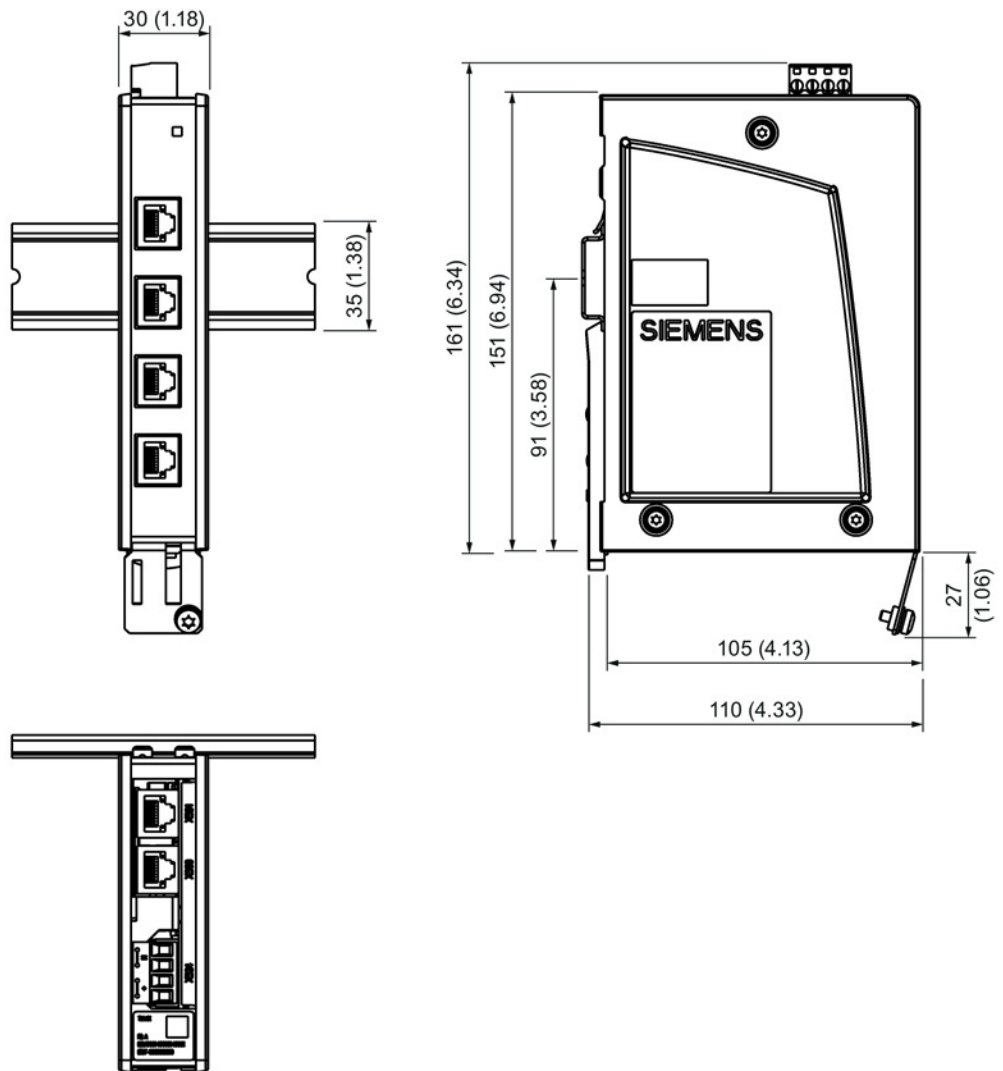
Dimension drawing of the DRIVE-CLiQ Hub Module DMC20, all data in mm and (inches)
